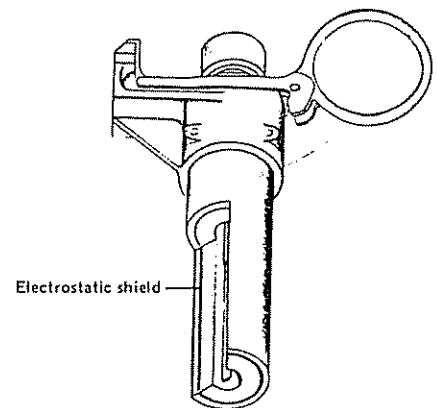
C — Cutaway drawing, showing shielding imbedded near outer surface of fuse tube.
